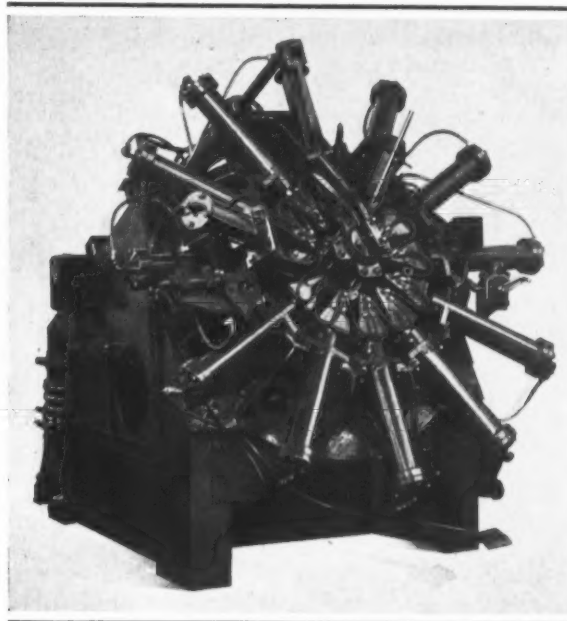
Welding Machine of Radial Design which Makes Forty-eight Welds in Ten Seconds
